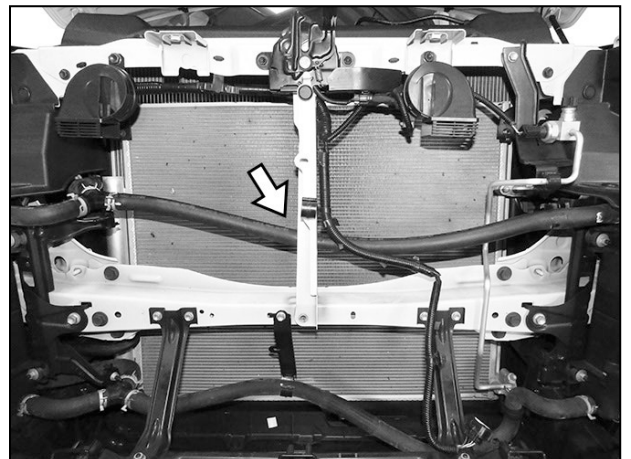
Remove hardware attaching driver/left hose mounting bracket (arrow)
